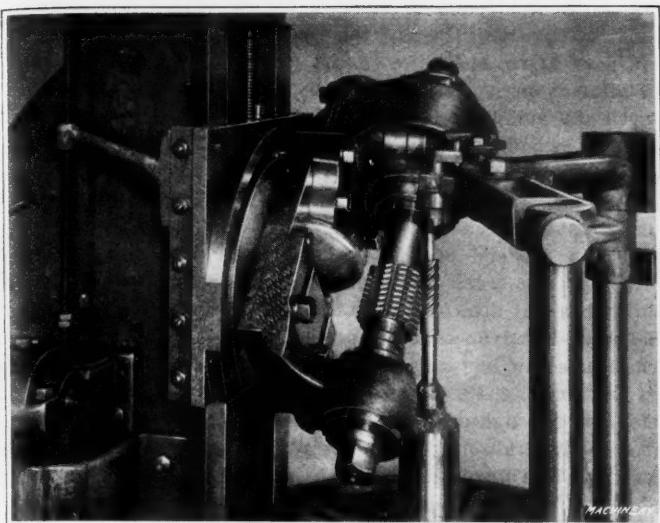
Milling the Threads of a Multiple-threaded Screw by Means of a Hob and a Regular Gear-hobbing Machine
